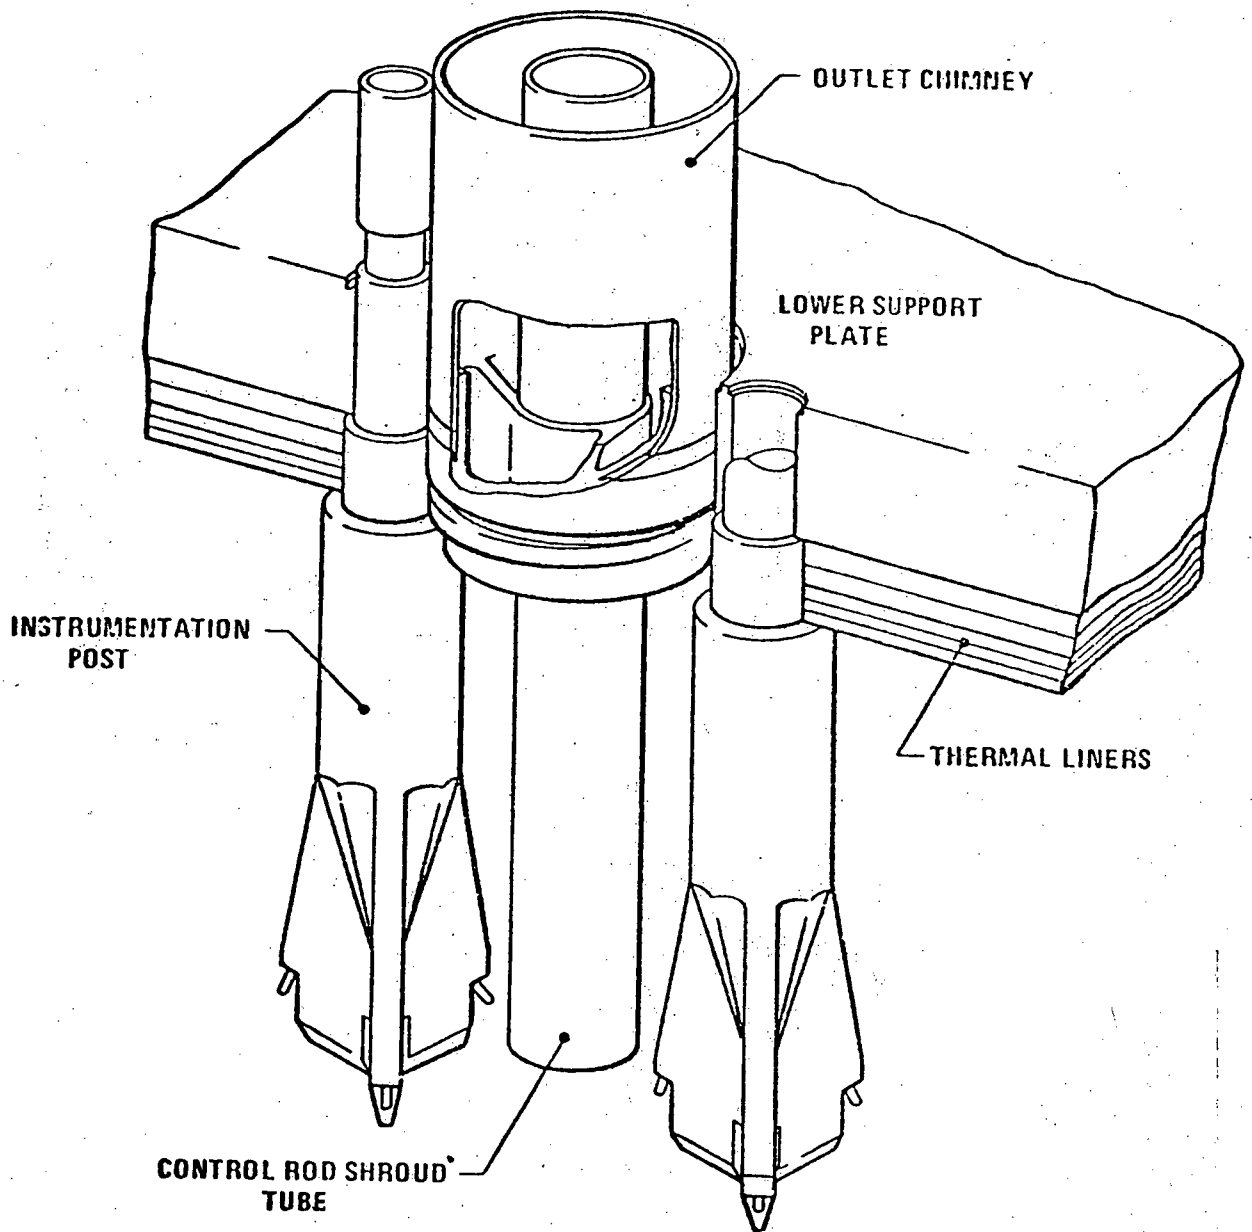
B Method of Positioning Control Rod Shroud Tube
